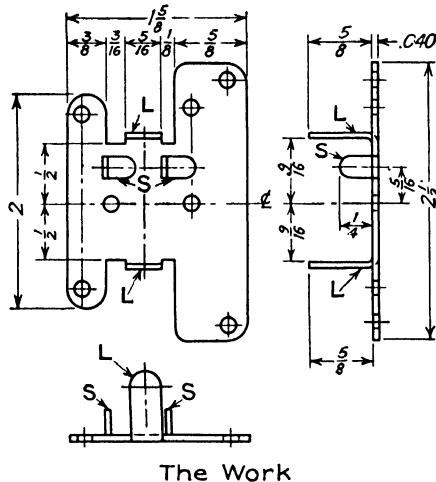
Specifications for a rear mounting plate used in a clock. This part is of 0.040-in. sheet zinc.
